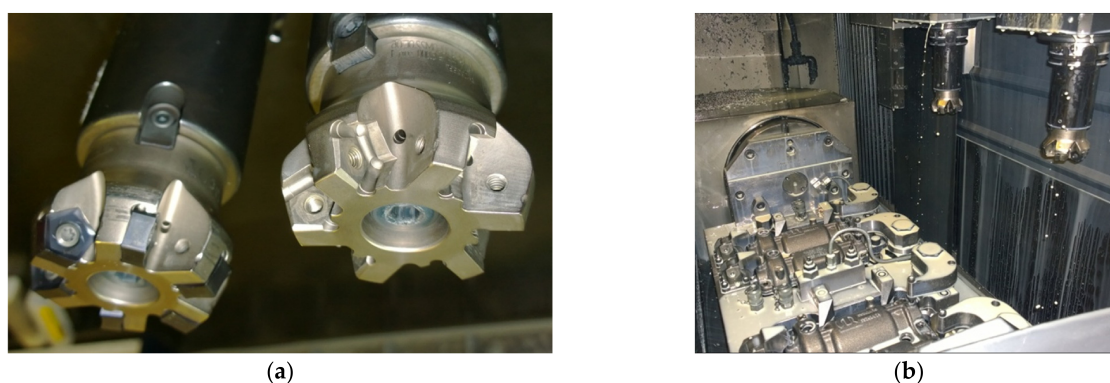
Machining of the tested castings: (a) View of the tool heads; (b) View of workpieces clamped in the machine tool's work area.
